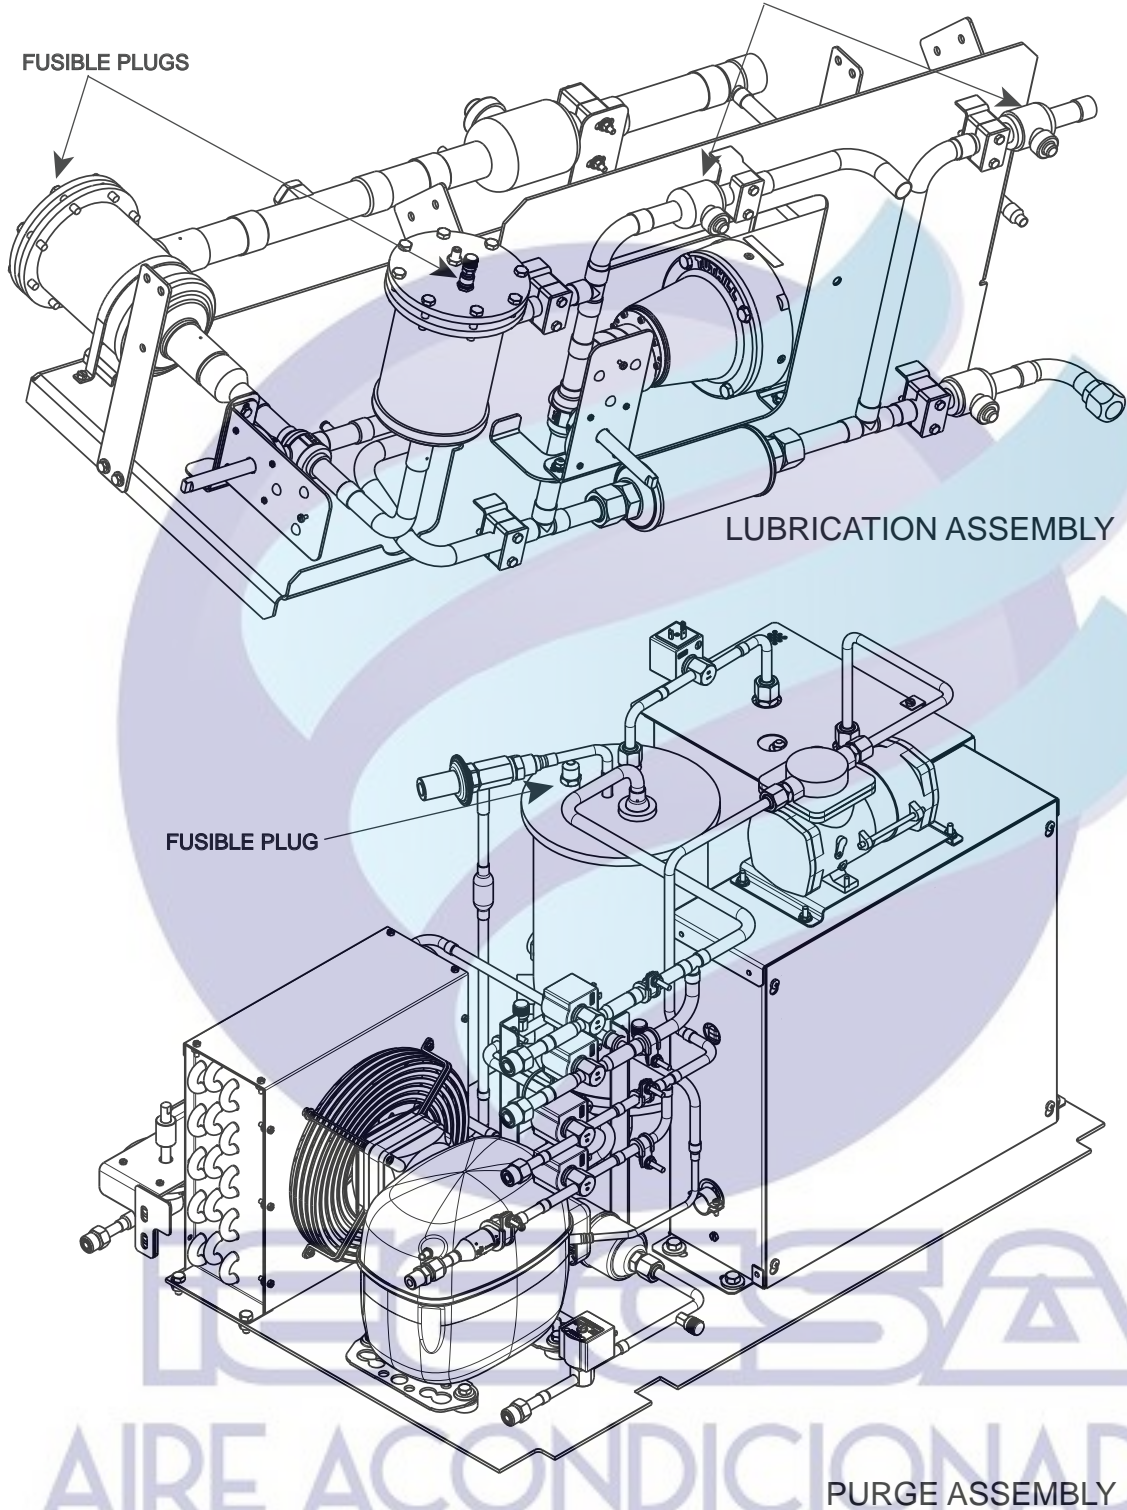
Location of Fusible Plugs in Lubrication Assembly and Purge Assembly
